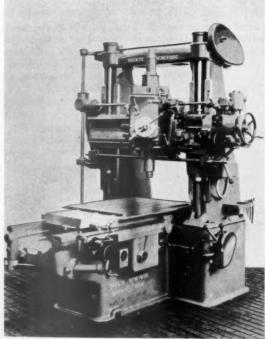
Combined boring and milling machine with optical measuring system and hydraulic milling feeds to table.
